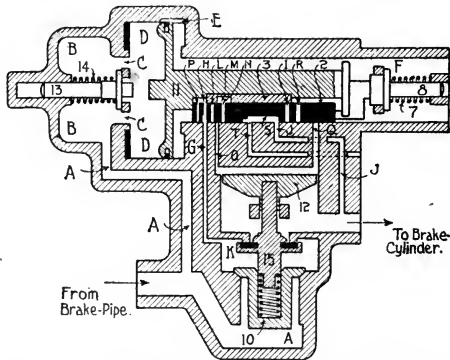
"K" Triple Valve in Full-Release and Charging Position.
